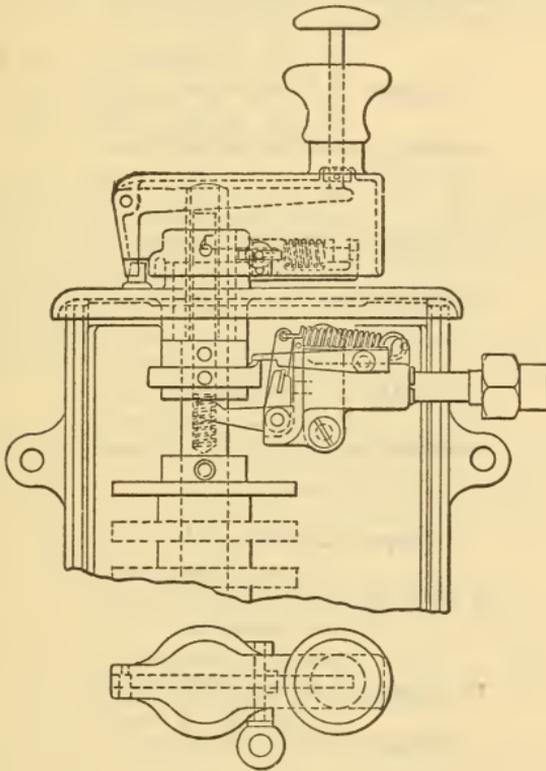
Details of Top of Master Controller Sprague G. E. Co., Multiple Unit System.
